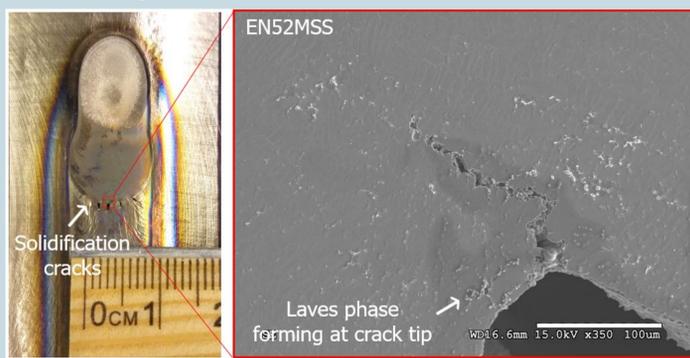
Example of solidification cracks formed during welding, with intermetallic Laves forming at the crack tip.
